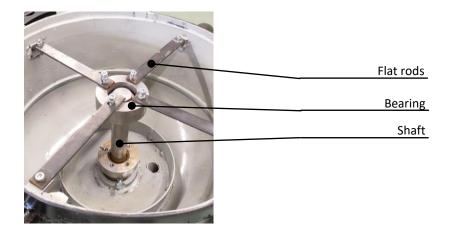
Bearing fixed to the collector to give an extra support. Source: author's own.
